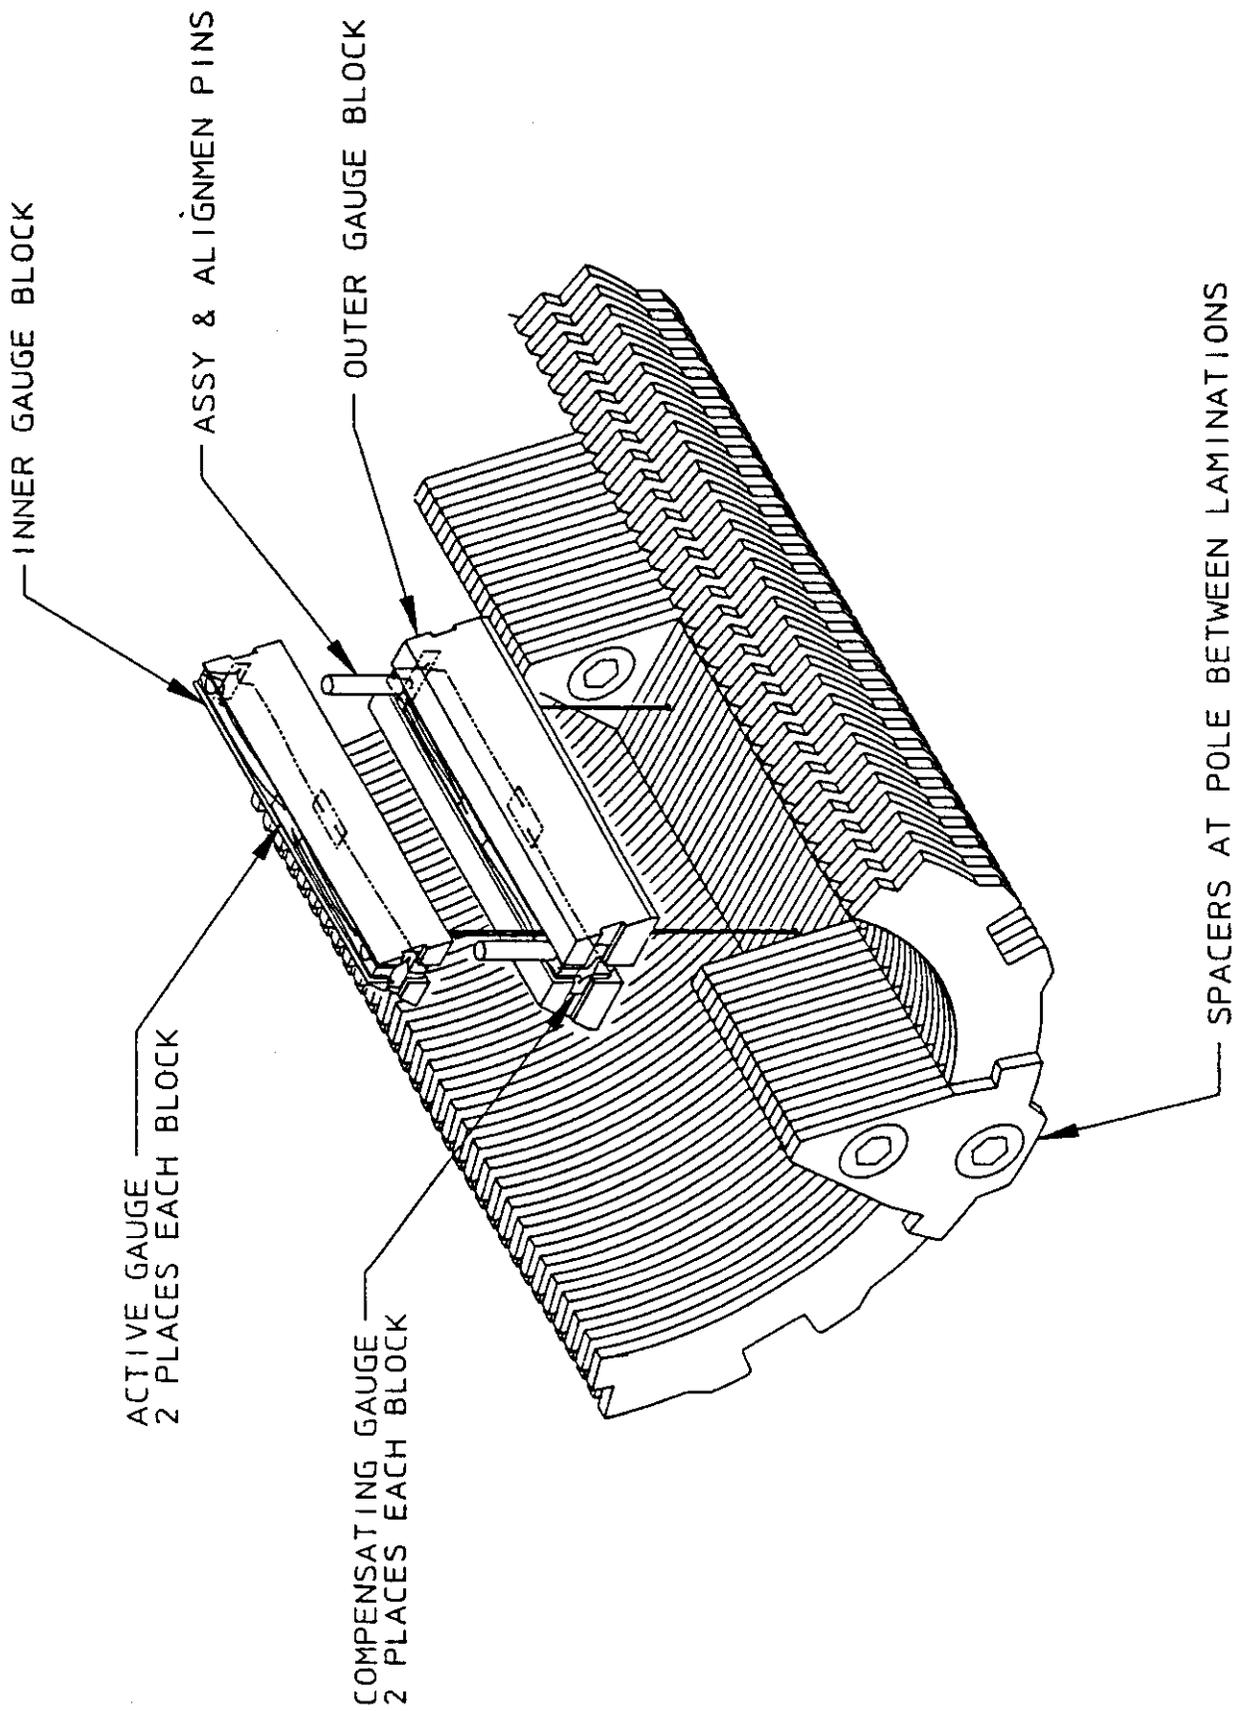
ARC QUADRUPOLE GAUGE PACK ASSEMBLY
